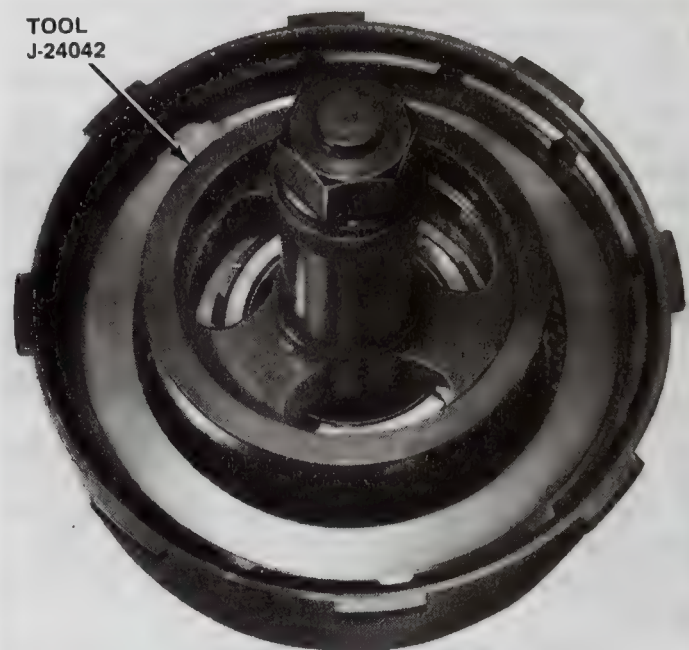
C-78 Front Clutch Spring Retainer Removal/Installation—Model 727
